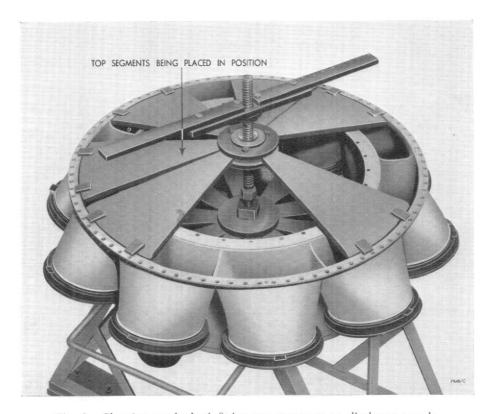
Showing method of fitting top segments to discharge nozzle.
